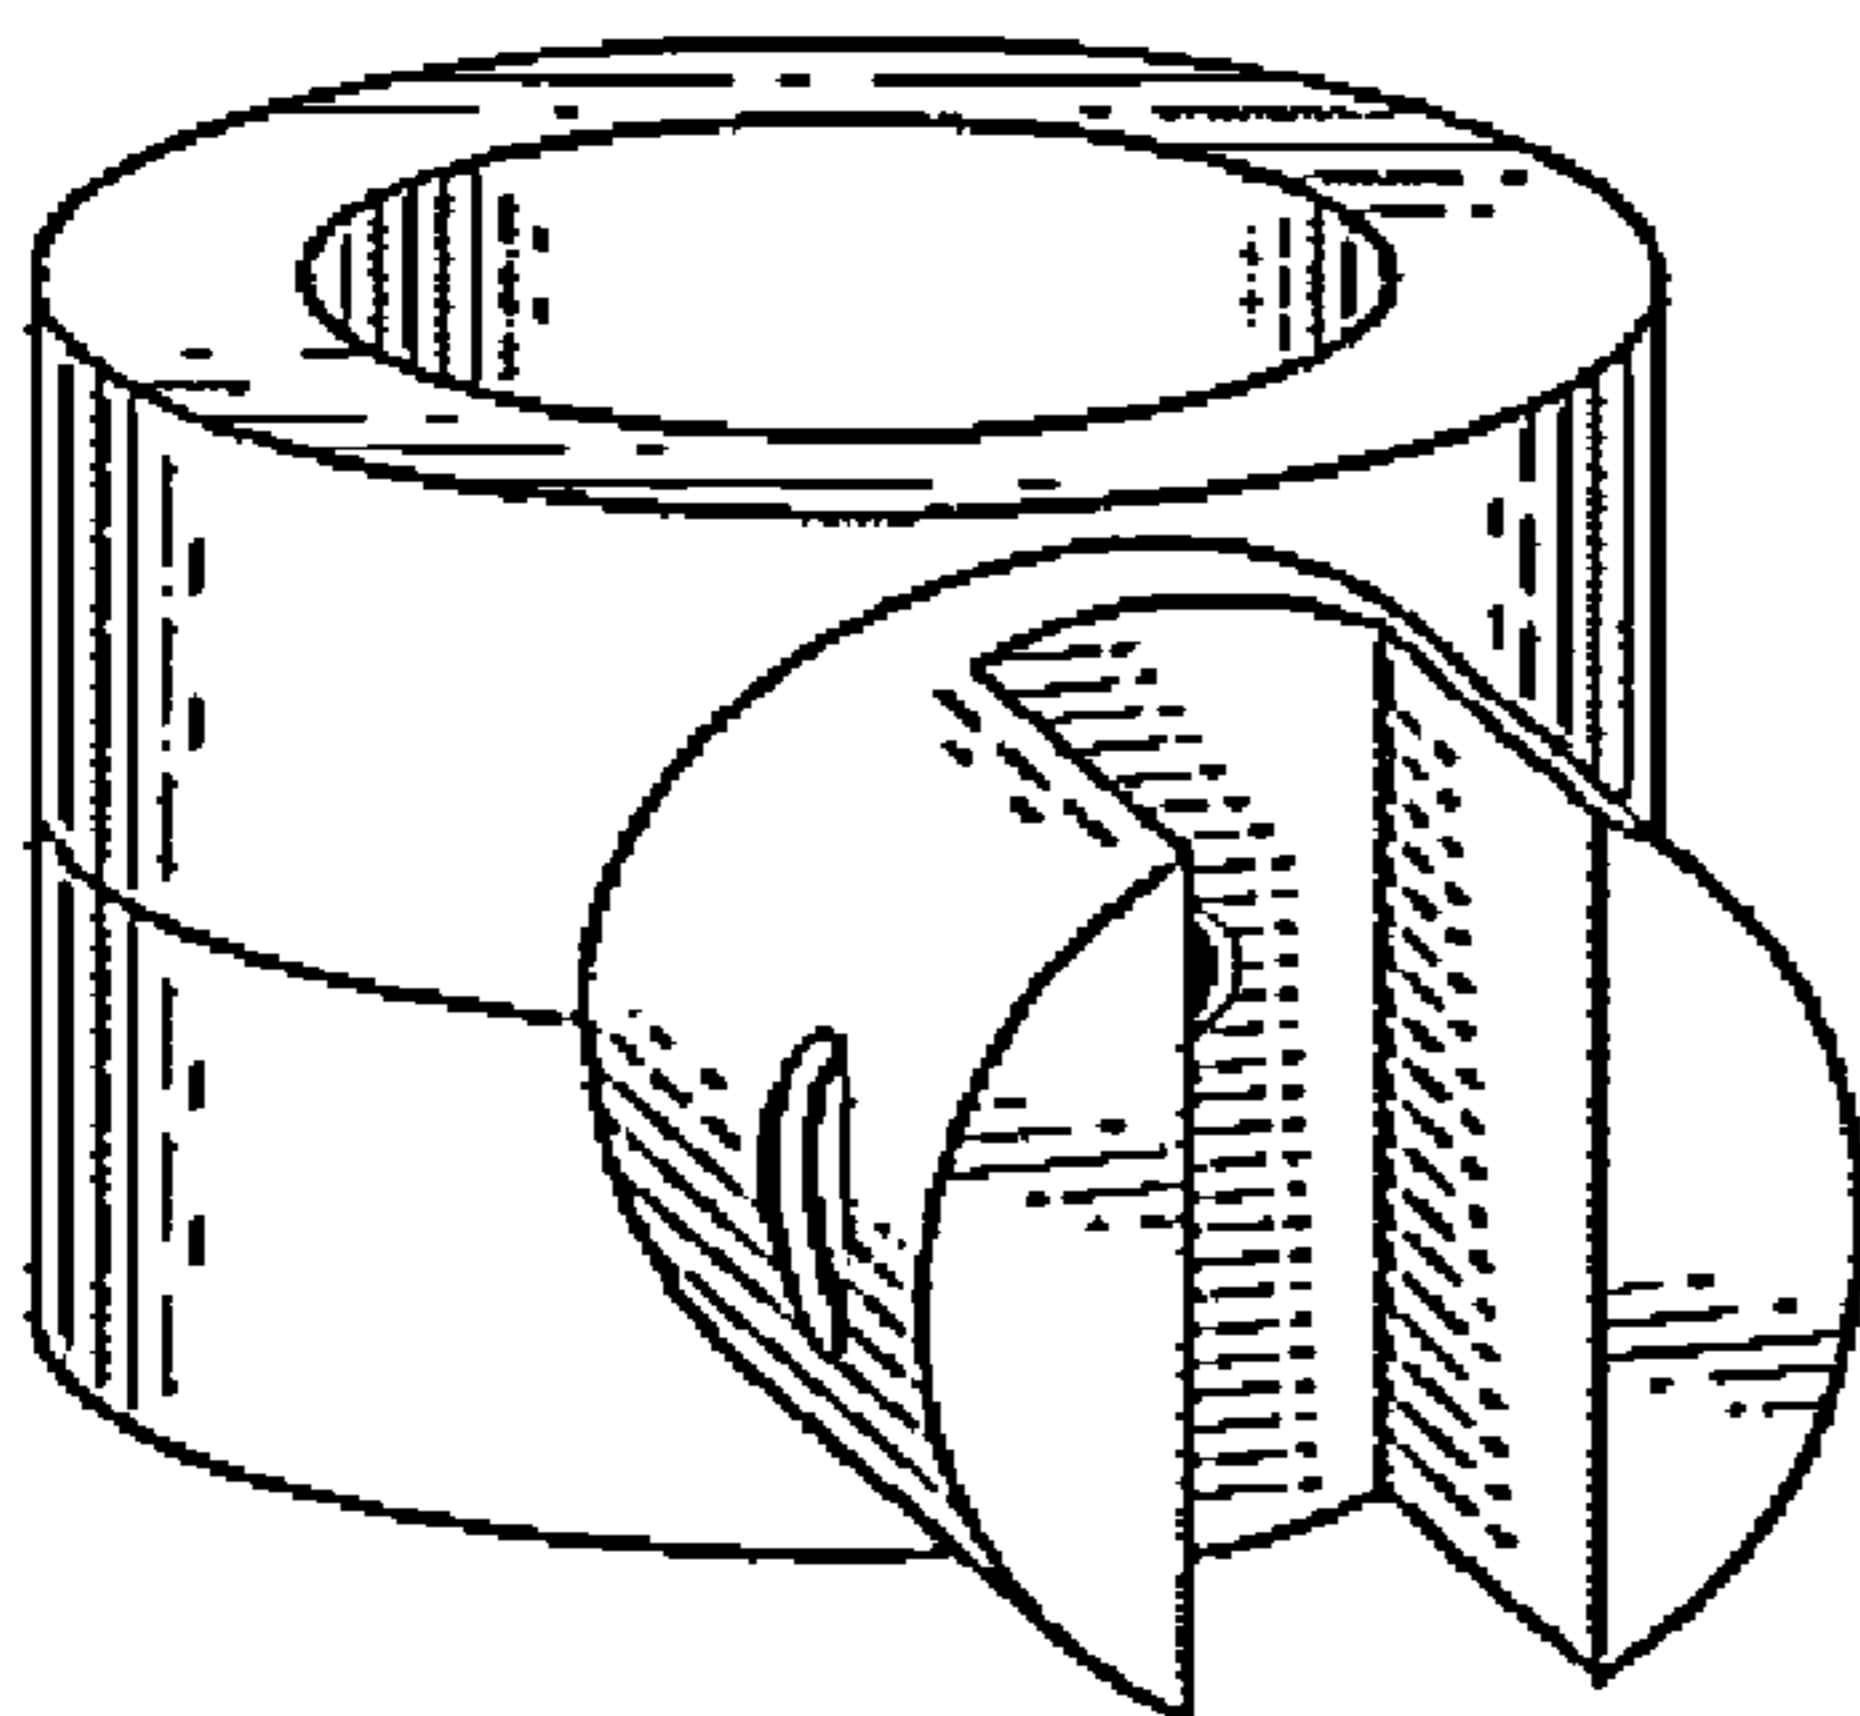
is a left side view of the bracket flange of FIG. 1
